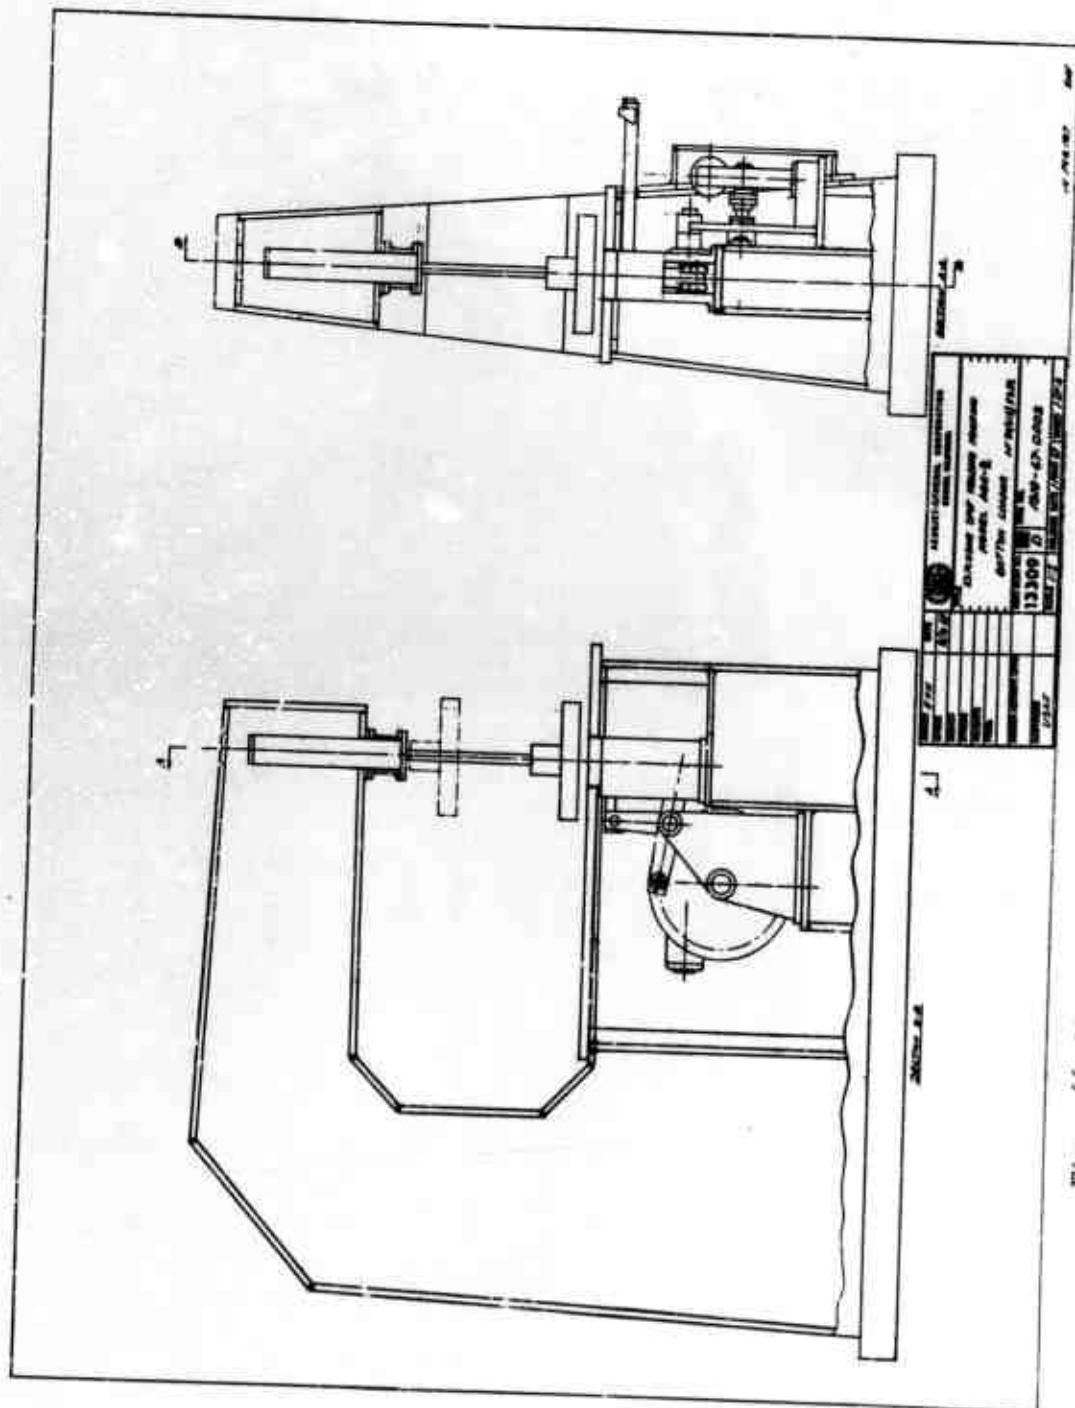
Model AGC-2 Explosive Spot Welding Machine (Sheet 1 of 4).
